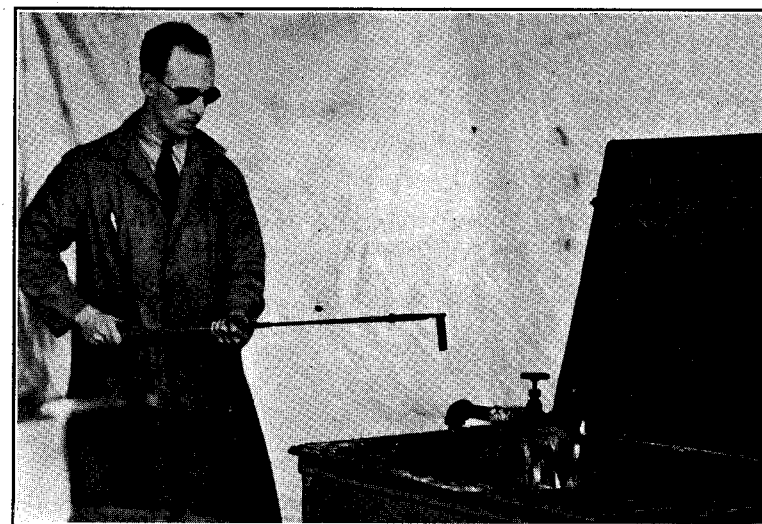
Showing Method of Quenching Specimens in a Standard Vertical Jig.
